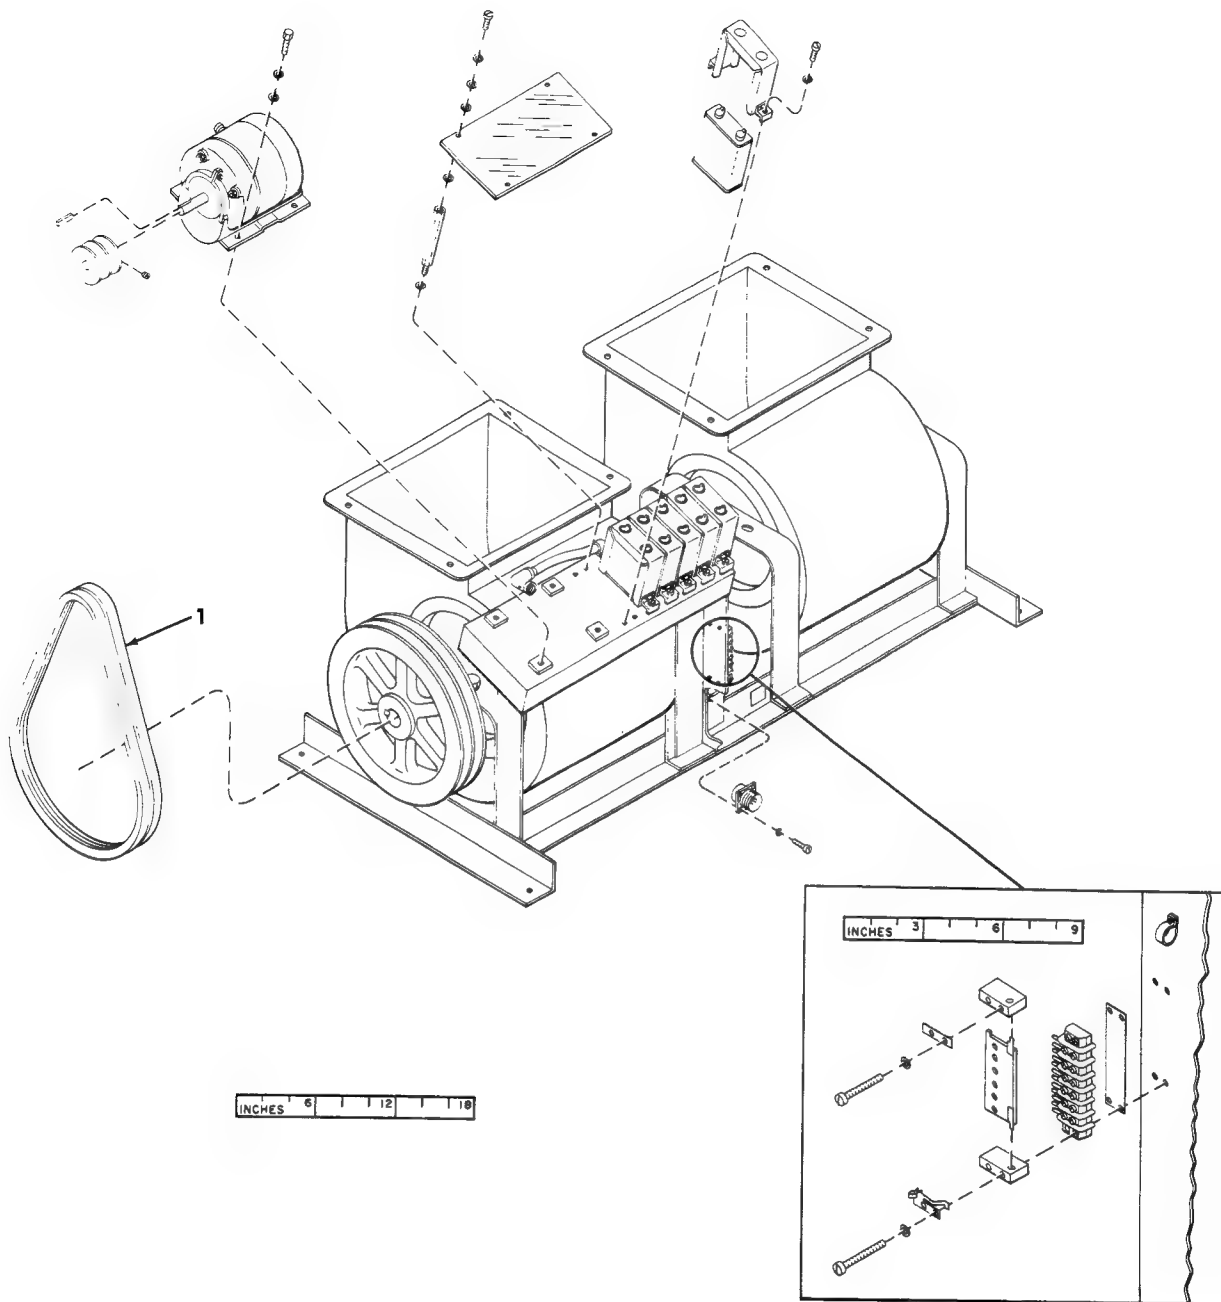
Tracking station group, guided missile (9143629 and 9988894)—partial exploded view
